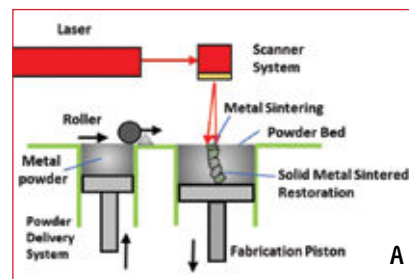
Laser sintering. (Selective laser sintering, selective laser melting, direct metal laser melting). The moving laser beam melts successive layers of metal powder converting them to a solid state. A roller rolls new powder layers for subsequent sintering as the crown or bridge is built up in layers
